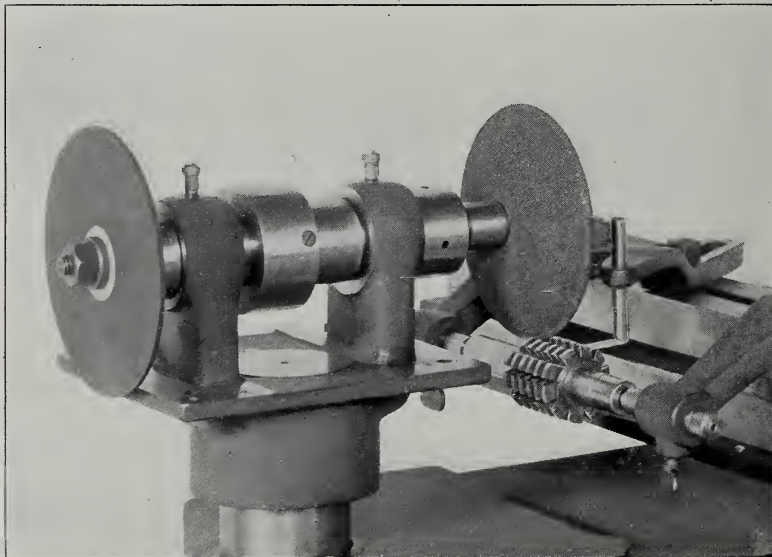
SHARPENING A HOB BY GRINDING THE FACES OF THE TEETH
